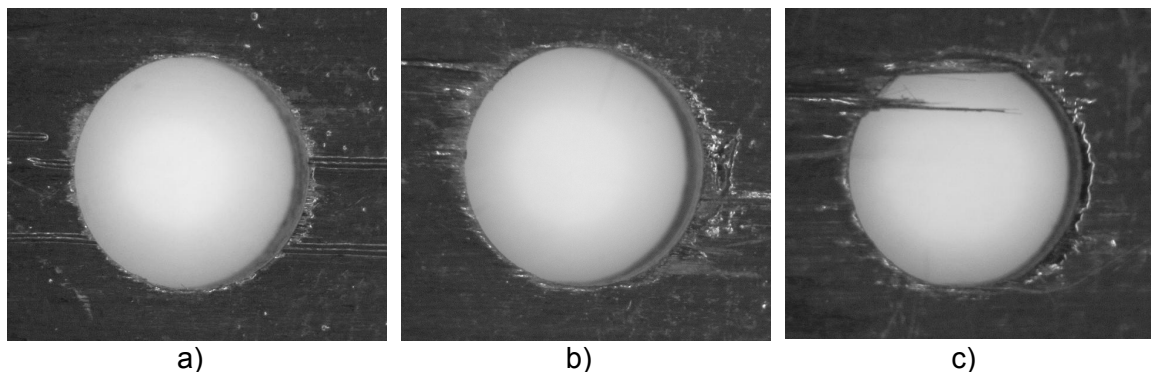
Plate exit side for several drills: a) twist drill; b) C-shape drill; c) stepD90 drill.
